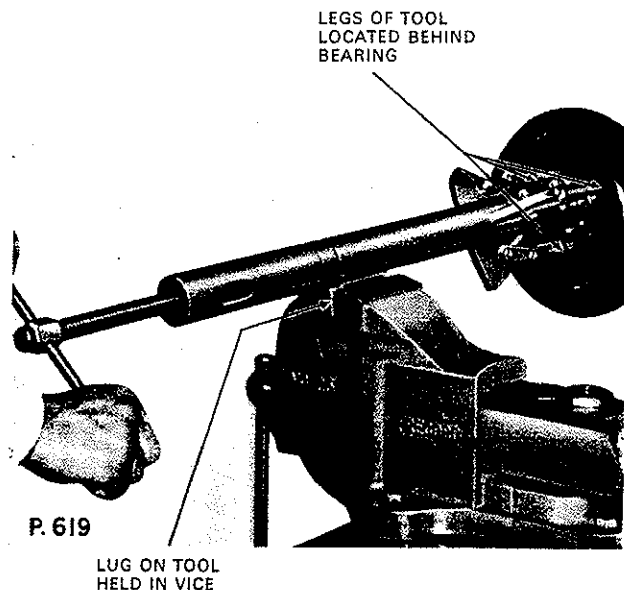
Removing the rear hub bearing from the axle shaft, using Churchill Tool R.G.330A
